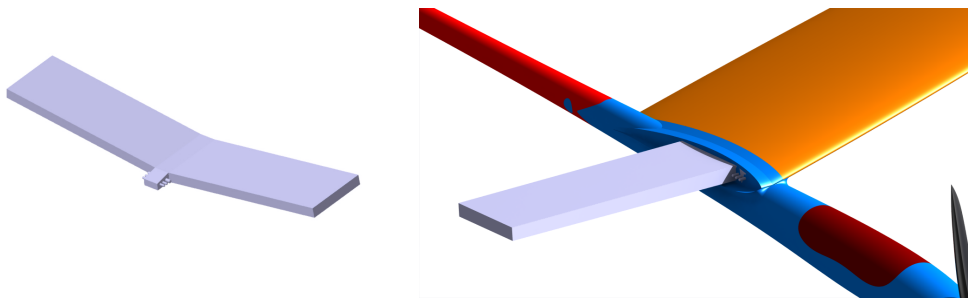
CAD drawing of the wing joiner battery pack.
